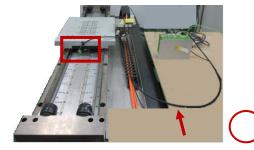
Fix the extension cable by cable tie and put into the cable chain
